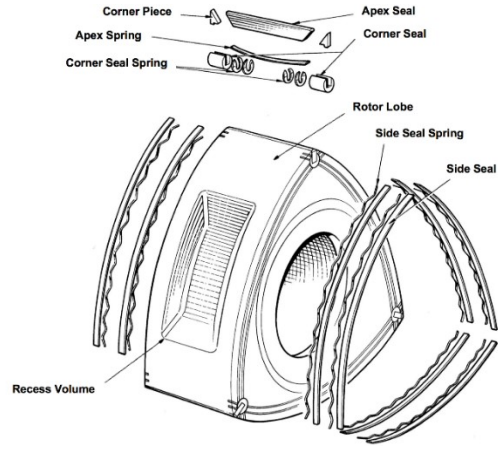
Exploded view of a generic Wankel Rotor. [Adapted from [22]]
